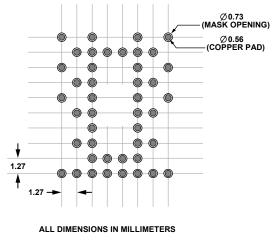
Recommend PCB Pattern, Solder Mask Defined Pads
